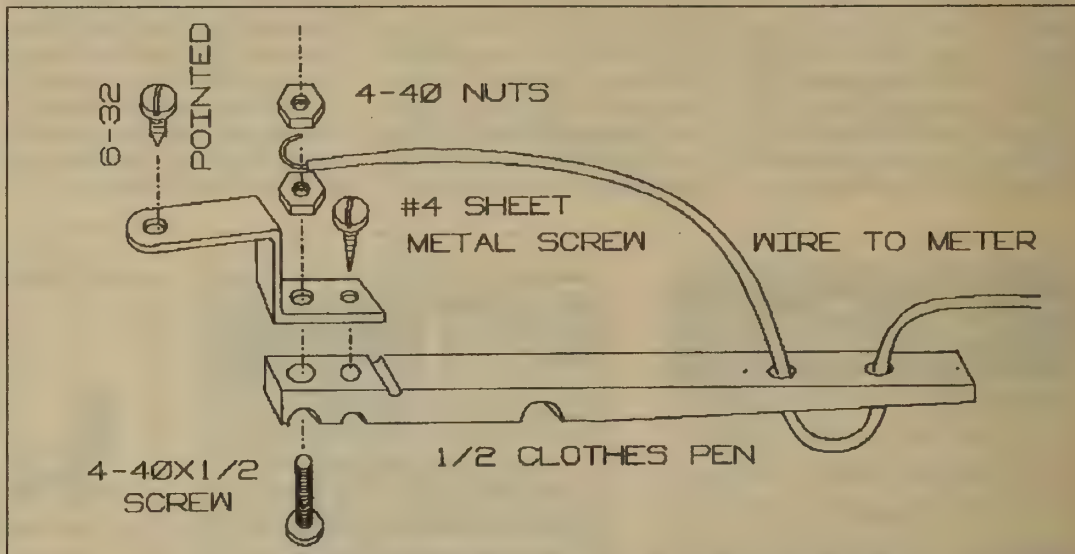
"Third Hand" assembly. Build two identical assemblies.
